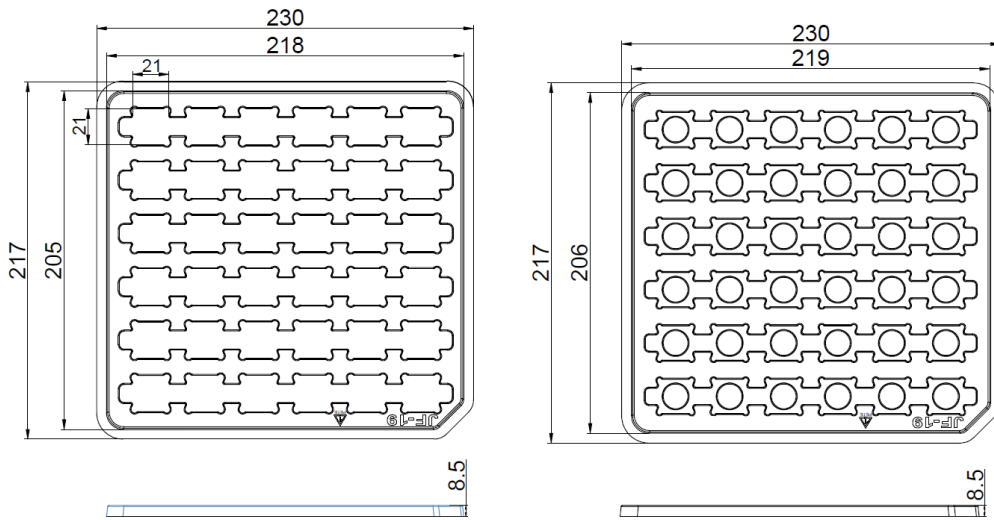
Tray dimensions for L2C6-xxxxxL06x1300, L2C6-xxxxxL08x1500, L2C6-xxxxxL10x1500.
